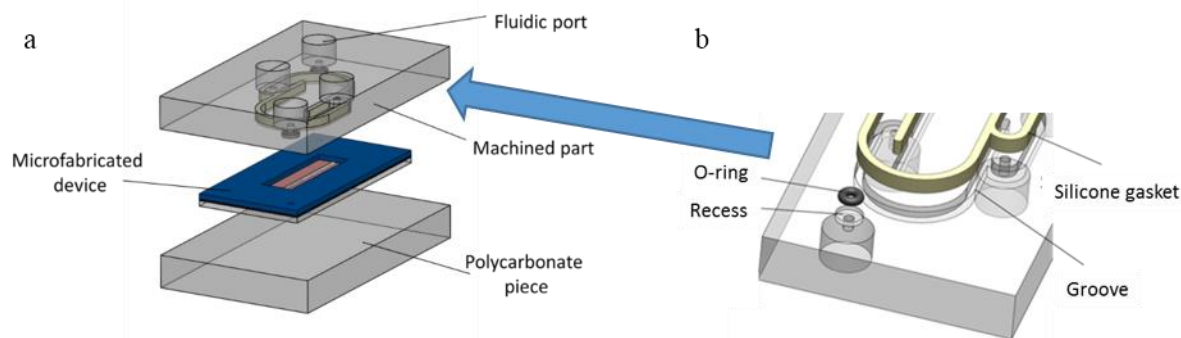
Package details: (a) depicts assembly of micro-fabricated device between package components, and (b) shows sealing components on the top of the two polycarbonate parts in (a)– a gasket and o-rings in machined grooves. The two pieces of polycarbonate are clamped together with screws that are not shown to improve the clarity of the pictures.
